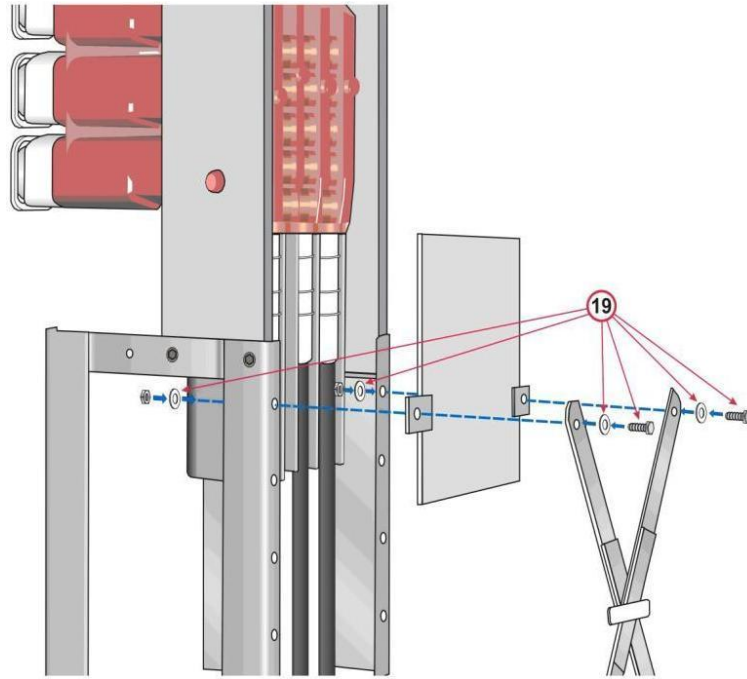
Installation of the Rear Barrier using M5 × 25mm Set Screws and M5 Flat Washer
